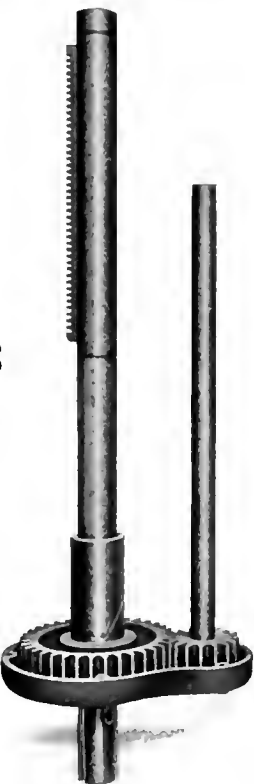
The Spindle with Large Diameter Driving Gear, close to the Drill
